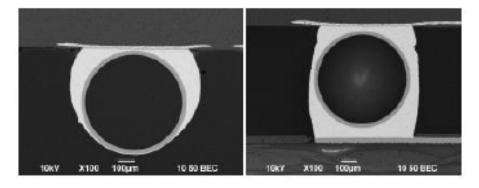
Cross-section of polymer core solder ball after balling (left) and assembly (right).
